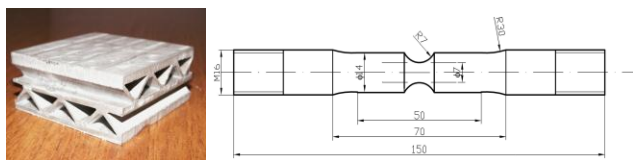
Casting of a trapezoidal structure and specimen with annular notch of \varnothing = 7 mm
